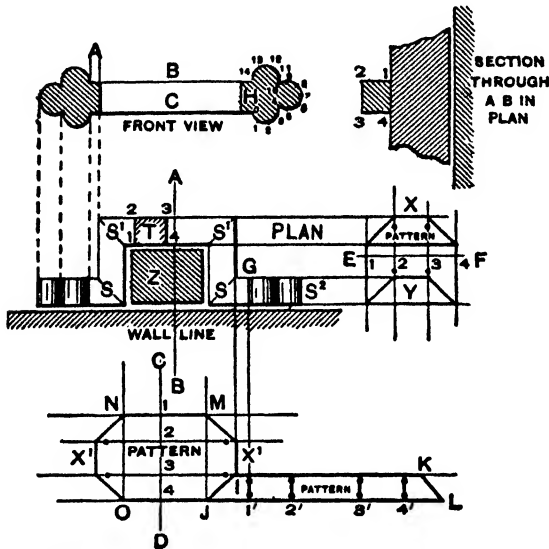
Front, Plan and Sectional Views of Hook Covering; also the Patterns
